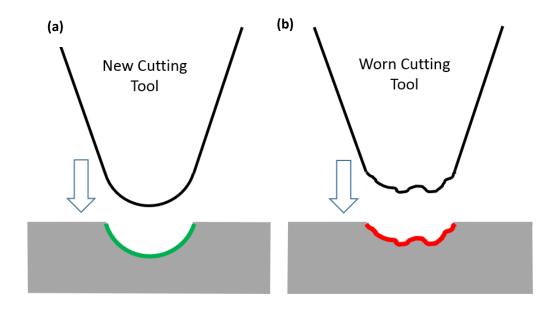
Comparison between the workpiece surfaces (a)new cutting tool and (b)worn cutting tool.
